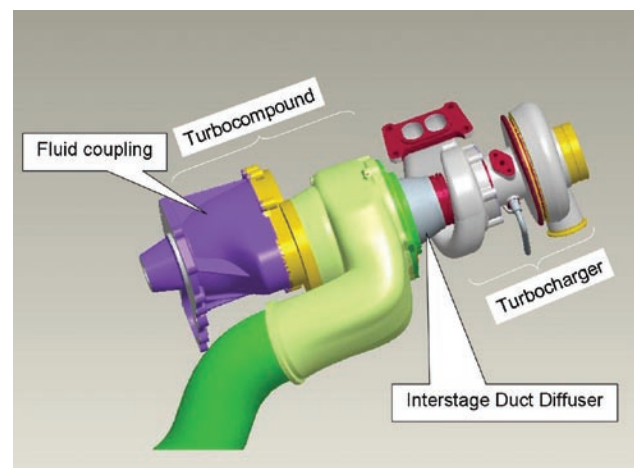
Computer Aided Design Drawing of the Turbocharger and Turbocompound Device Assembly Showing the Interstage Duct Diffuser and Fluid Coupling
